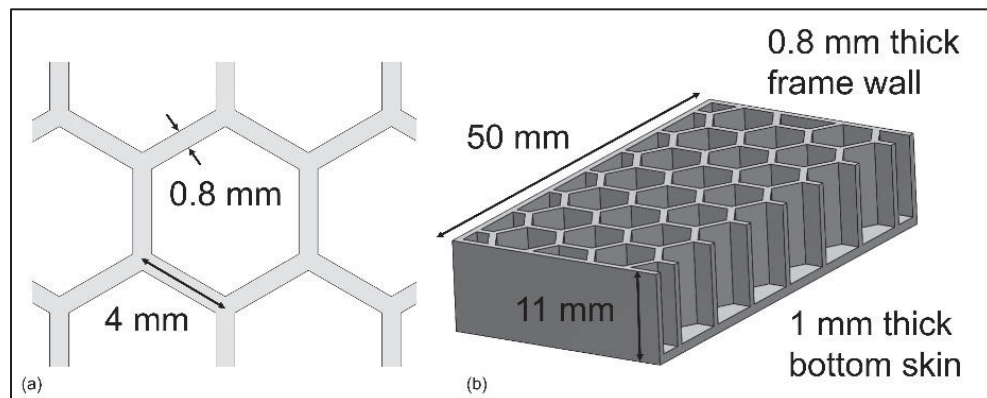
(a) Schematic of the honeycomb core with the single hexagonal cell dimensions and (b) the general sample dimensions
